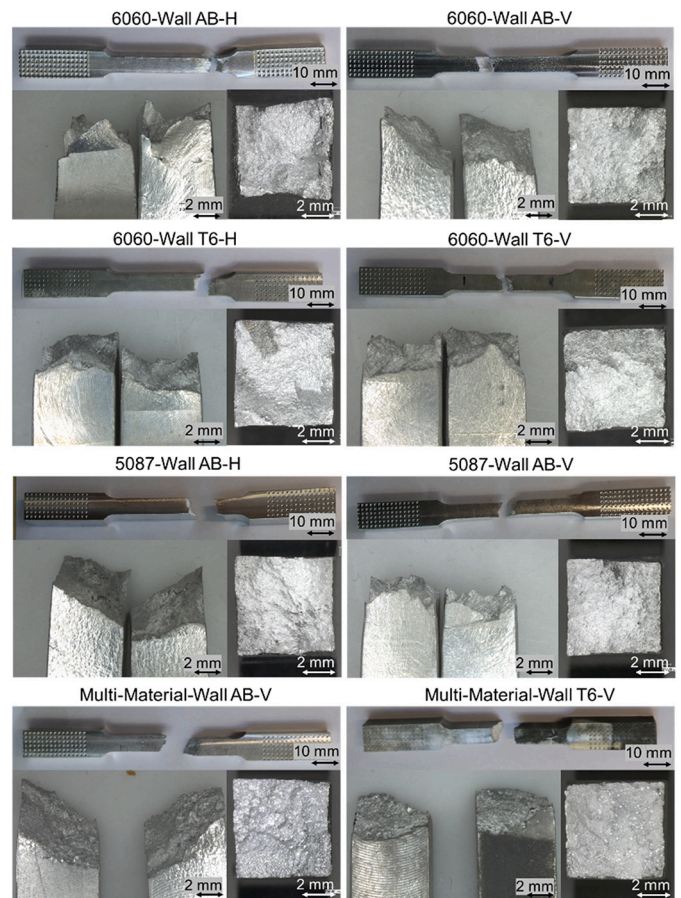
Fracture locations and fracture surfaces of the mono-material specimens of 6060, 5087, and the multi-material specimens of 6060 and 5087, in the as-built (AB) and T6 heat-treated (T6) conditions, in horizontal (H) and vertical (V) direction.
